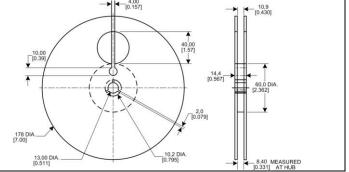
SS361RT Mounting/Tape and Reel Dimensions (For reference only. mm/[in])
